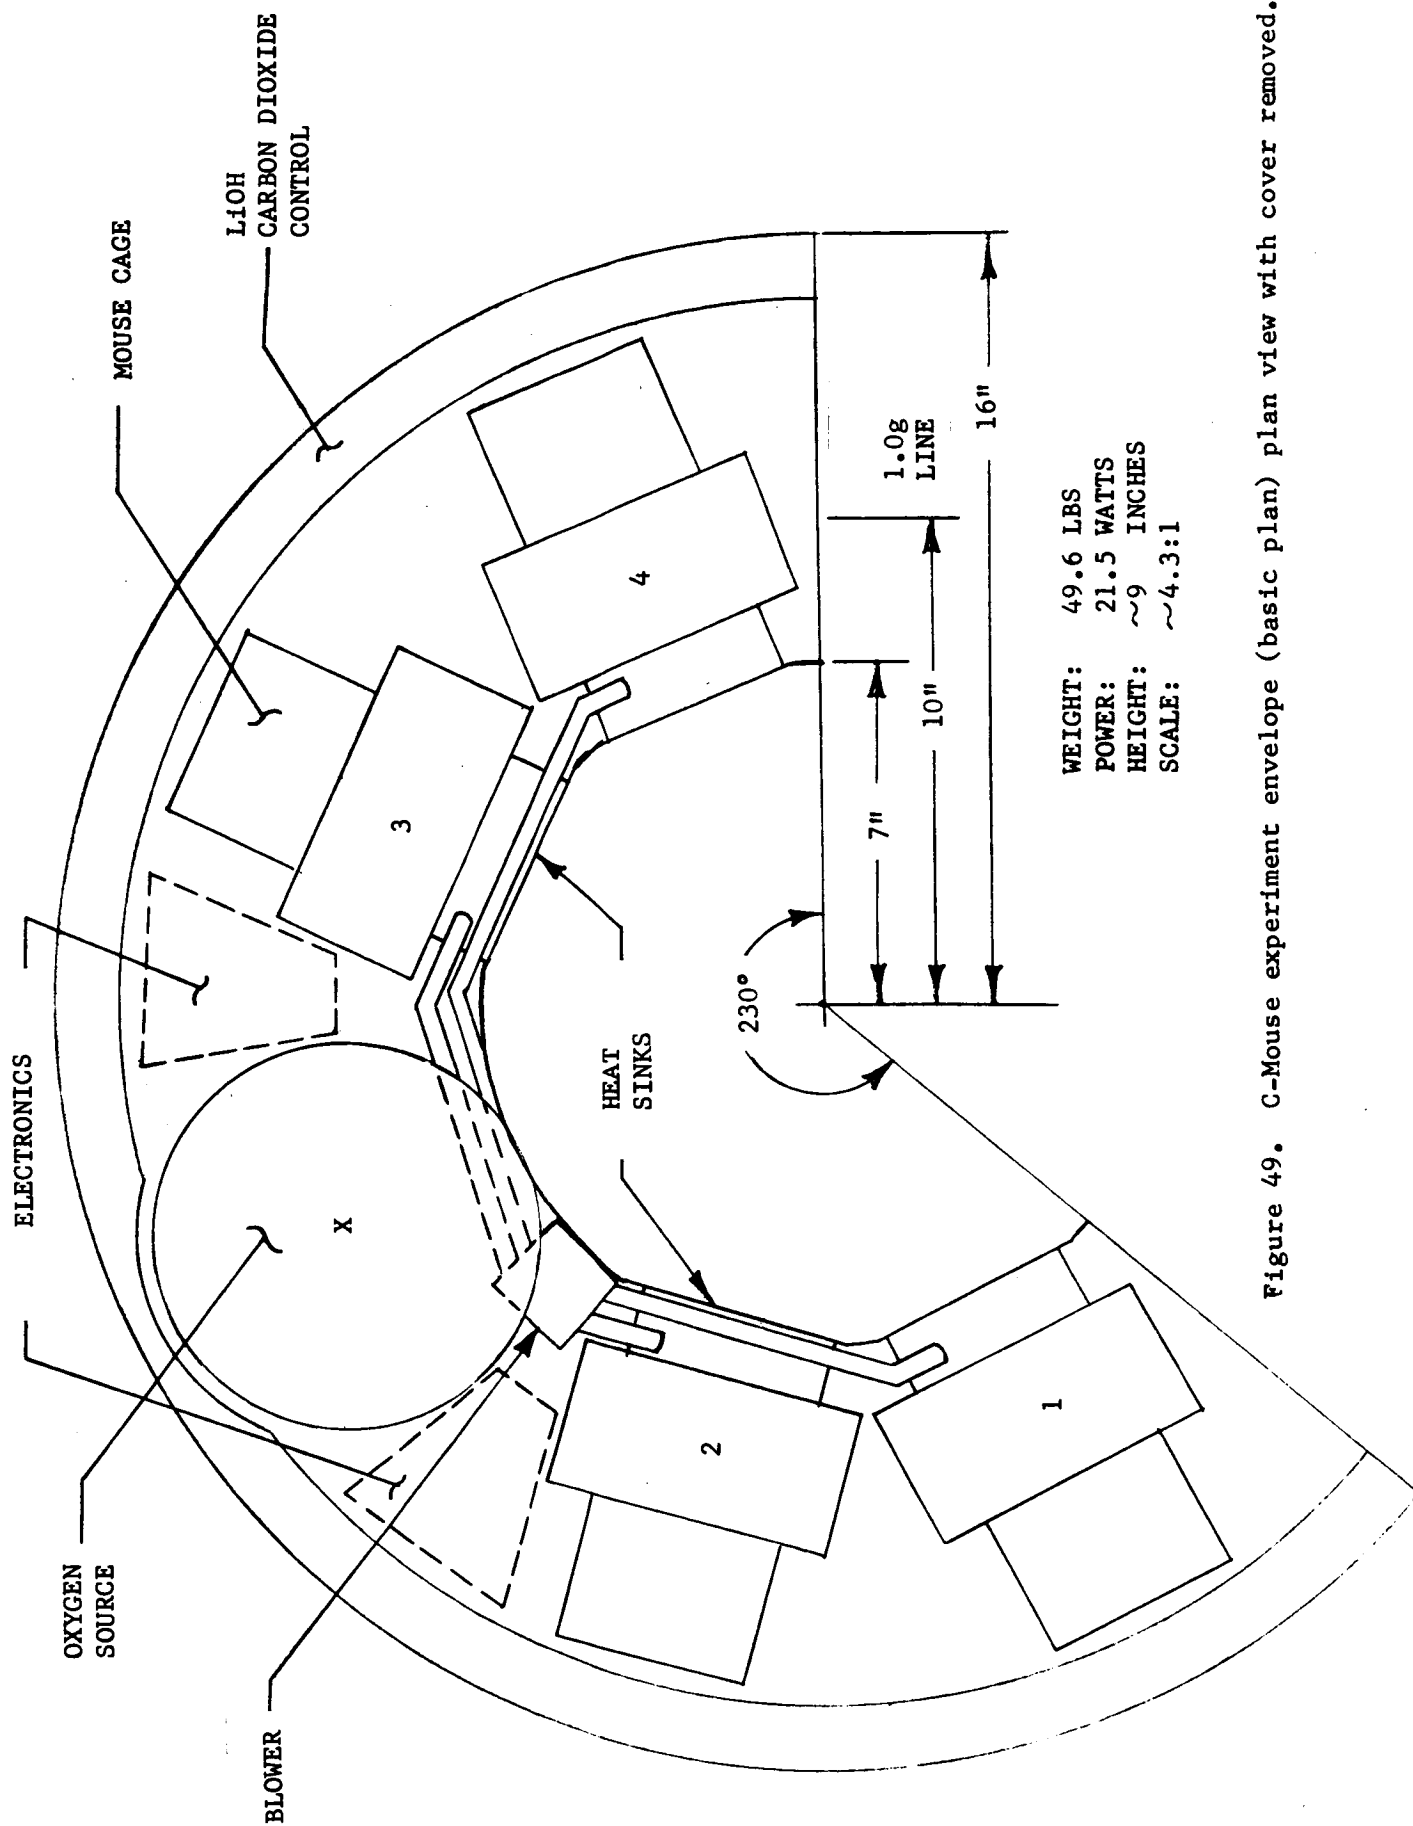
C-Mouse experiment envelope (basic plan) plan view with cover removed.
